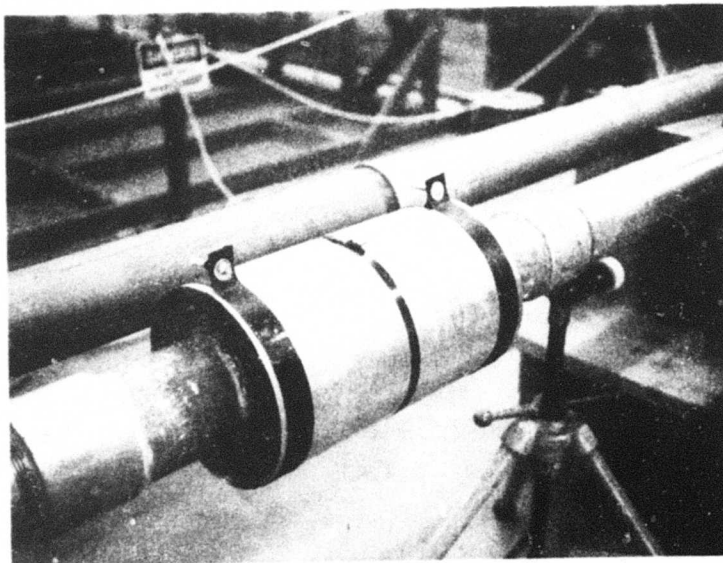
Cable-gripper box with shroud and locally manufactured clamps and one metal shipping band.
